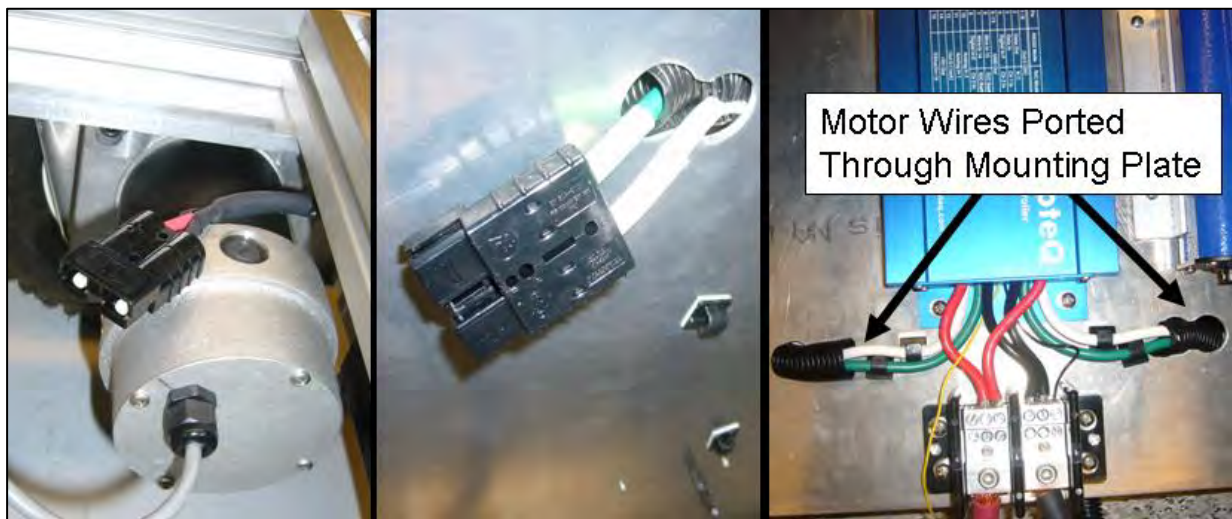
Motor connector (left), controller connector (center), controller with ported wires (right)
